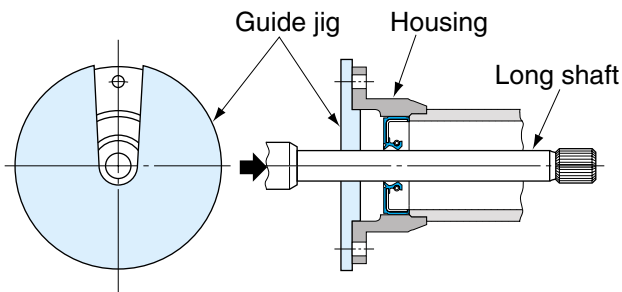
Guide jig for inserting of long shaft into seal bore
